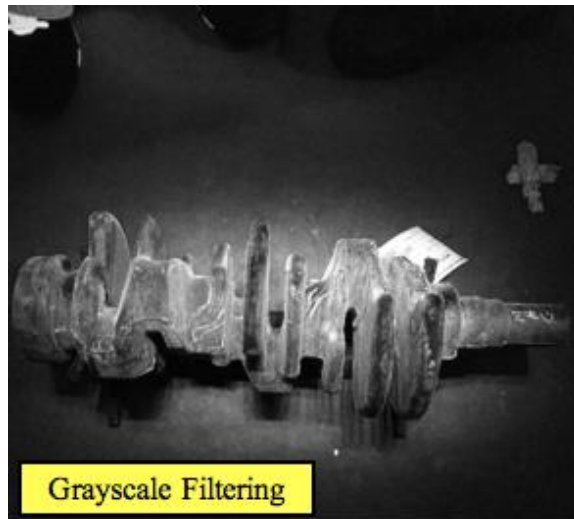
I-Phone image of crankshaft crack using grayscale filtering in MATLAB
